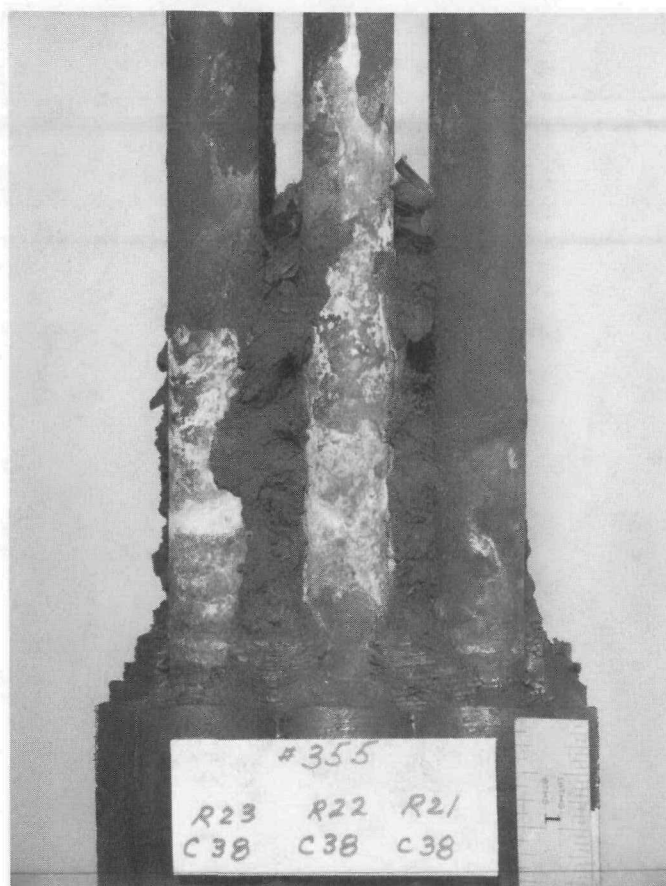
View of Sludge Pile Above Hot Leg Tube Sheet Section 355
